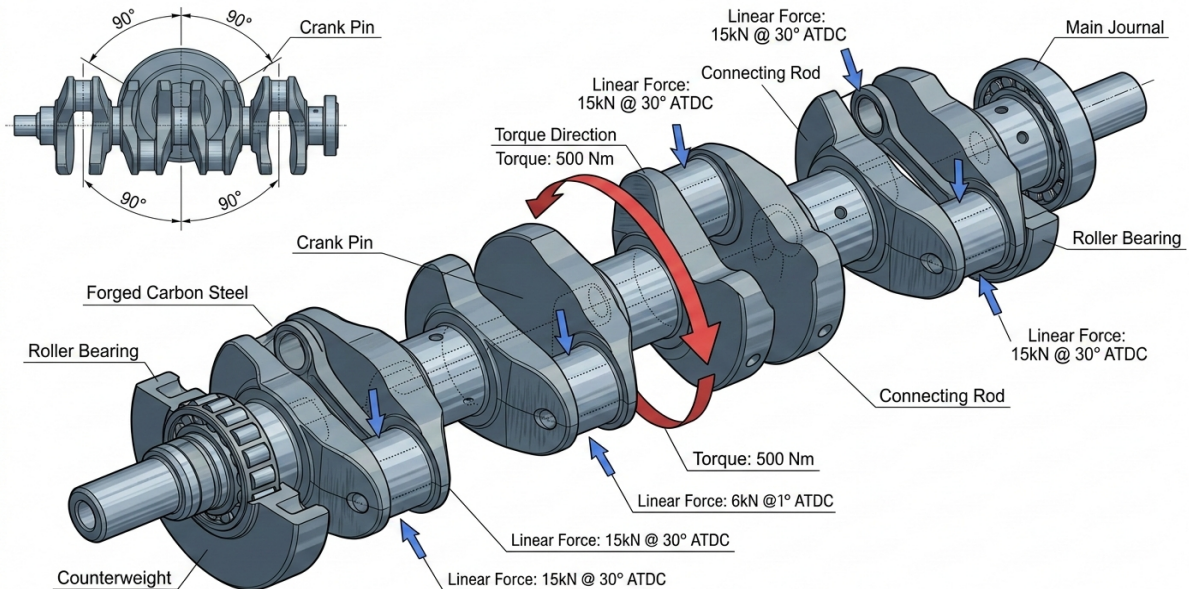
Crankshaft mechanical diagram showing eight offset crank pins at 90° intervals, connecting rod attachment points, main journals, roller bearings, counterweights, and applied force vectors (15 kN @ 30° ATDC). Red arrows indicate torque direction (500 Nm).
